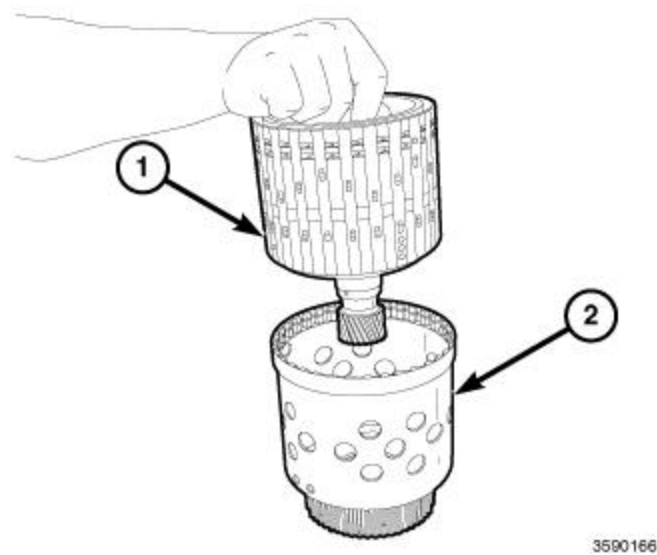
P4 Sun Gear/C/E Clutch Retainer & D-Clutch Drum
